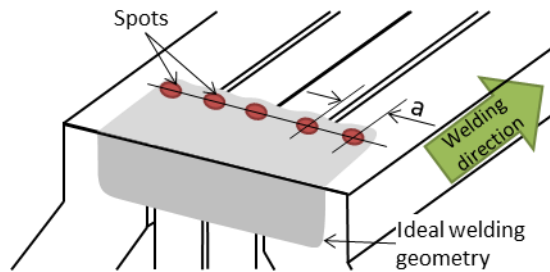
Principle of placing multiple laser spots on a row for controlling weldpool geometry. Sketched on a joint containing four sheets. “a” indicates spot distance.
